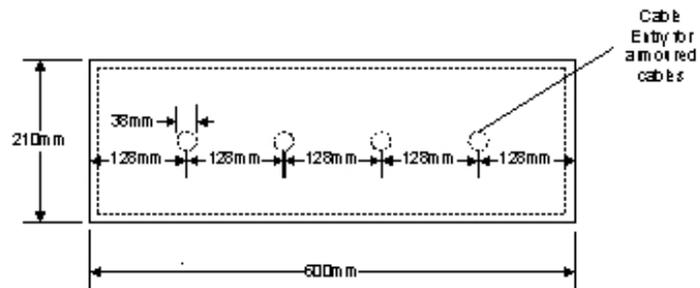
M : MV/HV, 1,2,3 OR 4 FEEDER METER TEST BOX - Front View
